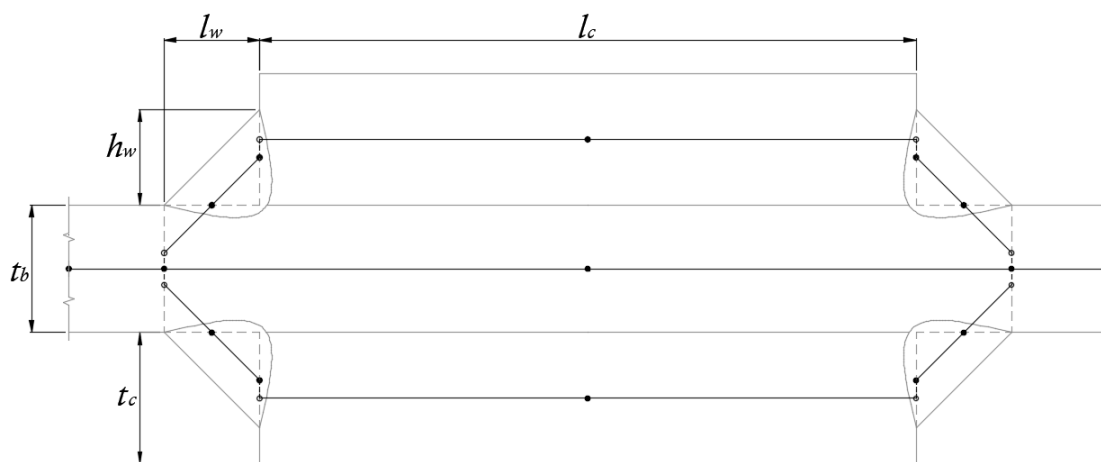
Single weld element beam model of DS cover plate [9]
